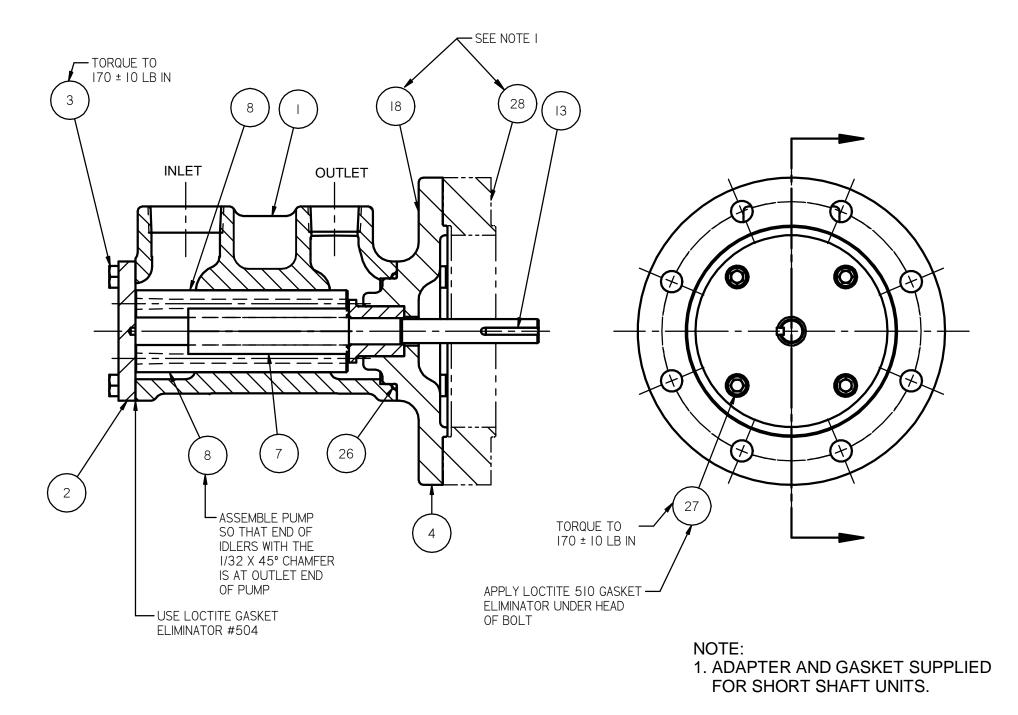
IRON CASE C-FACE MOUNT with BRACKET
